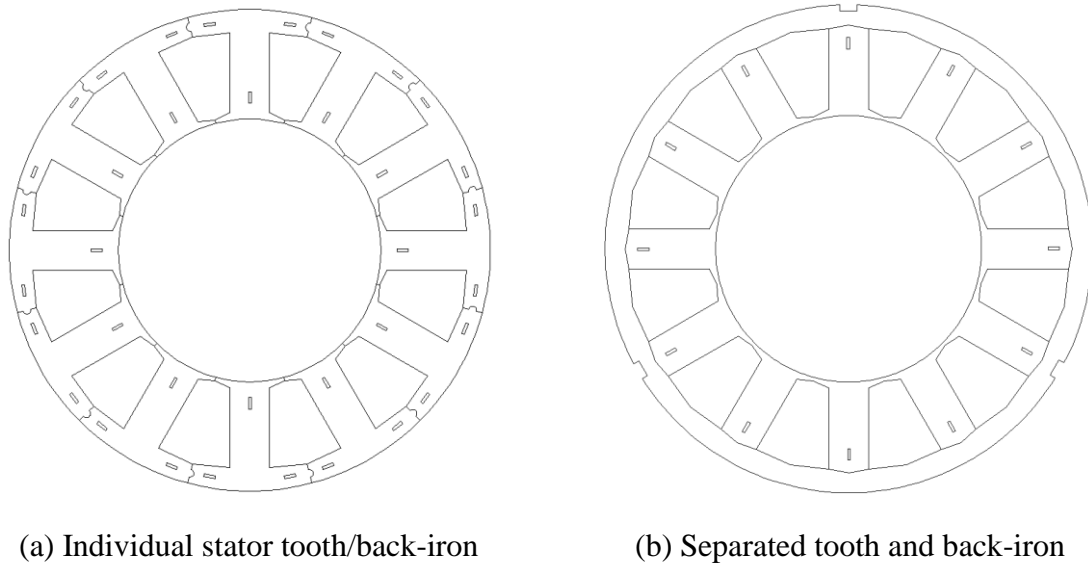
Modular stator techniques in FSCW PM machines [ZHU12].
